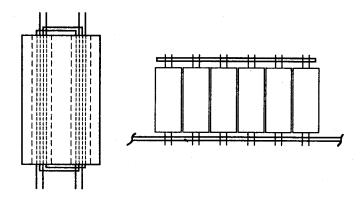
The upright matrix transformer module has printed circuit pins on each end. One end mounts in a circuit board. The other may be interconnected with a small daughter board, which can be installed ahead of time.
